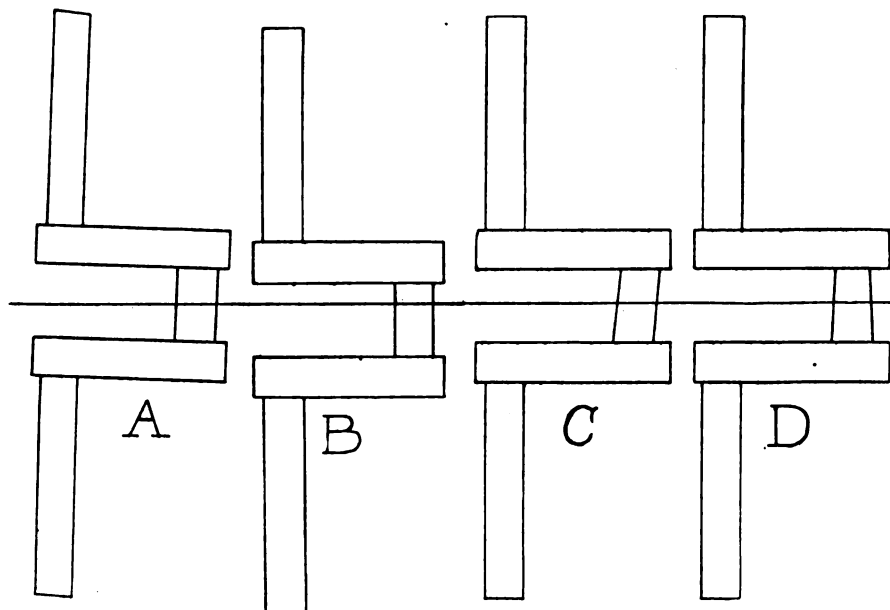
FAULTS SOMETIMES FOUND IN CRANK SHAFTS. (Exaggerated in the drawing.)
